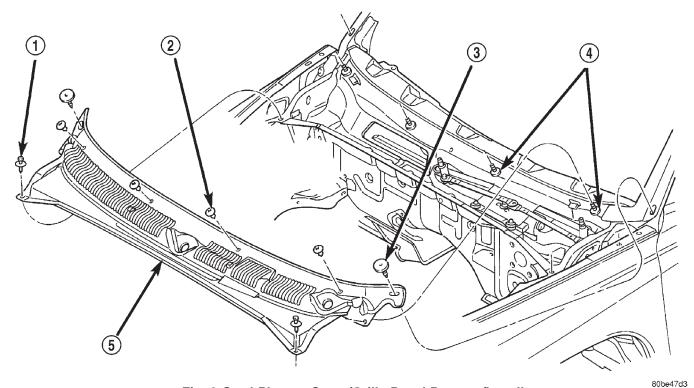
Cowl Plenum Cover/Grille Panel Remove/Install
